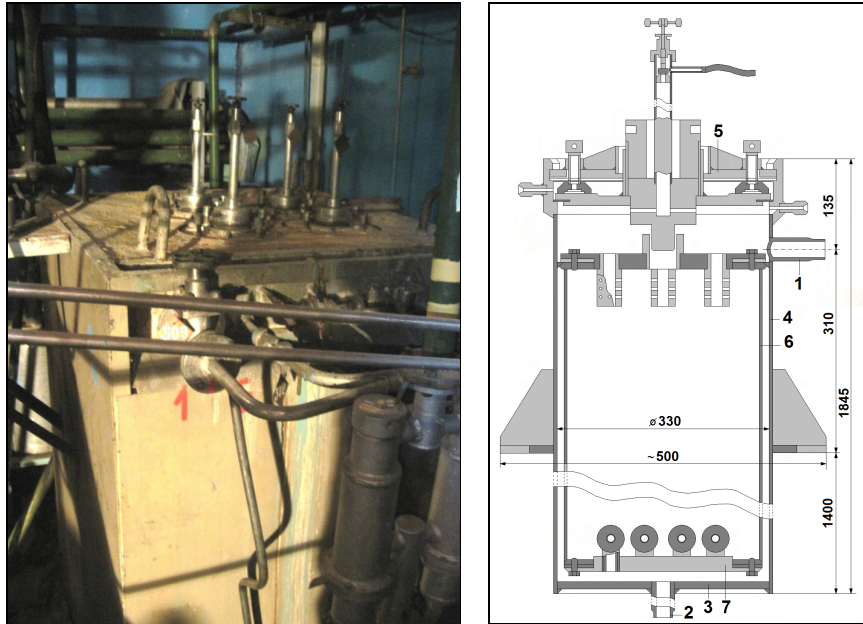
Filters: general view (left) and drawings (right): 1 – input pipe; 2 – output pipe; 3 – bottom; 4 – external sidewall; 5 – cover; 6 – internal sidewall; 7 – bed plate.
